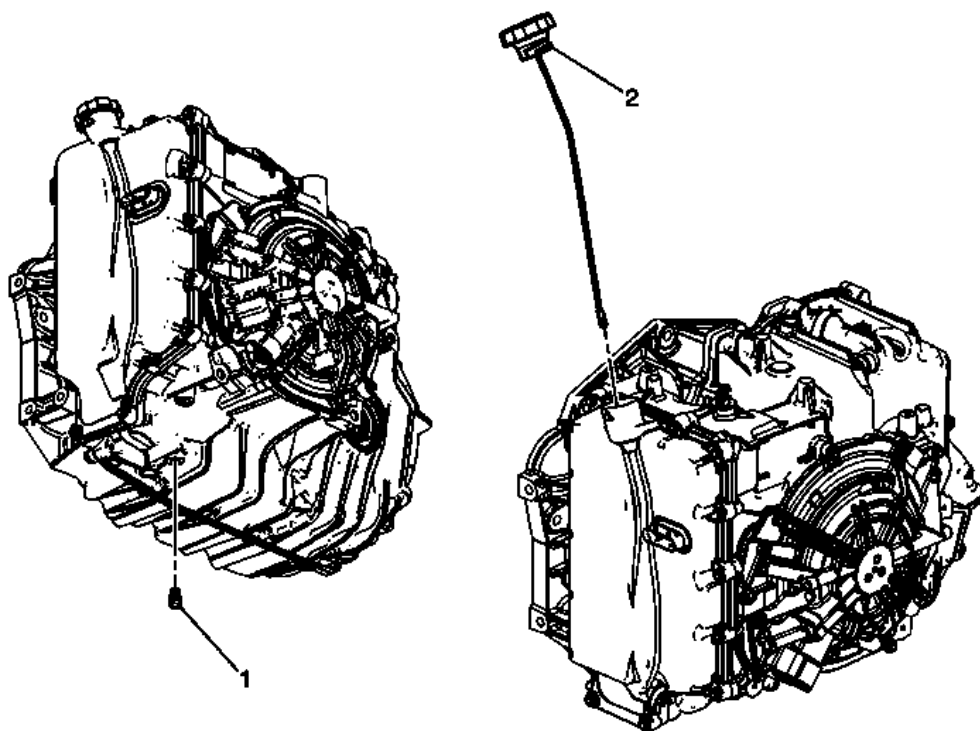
Identifying Fluid Level Indicator & Drain Plug
